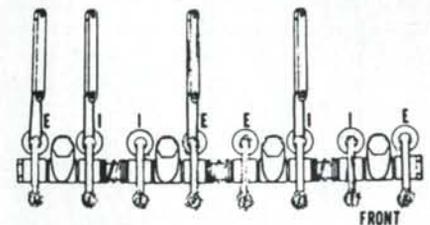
With No. 1 cylinder on TDC exhaust stroke on four-cylinder engines, adjust intake valve on No. 2 cylinder, exhaust valve on No. 3 cylinder and intake and exhaust valves on No. 4 cylinder.
